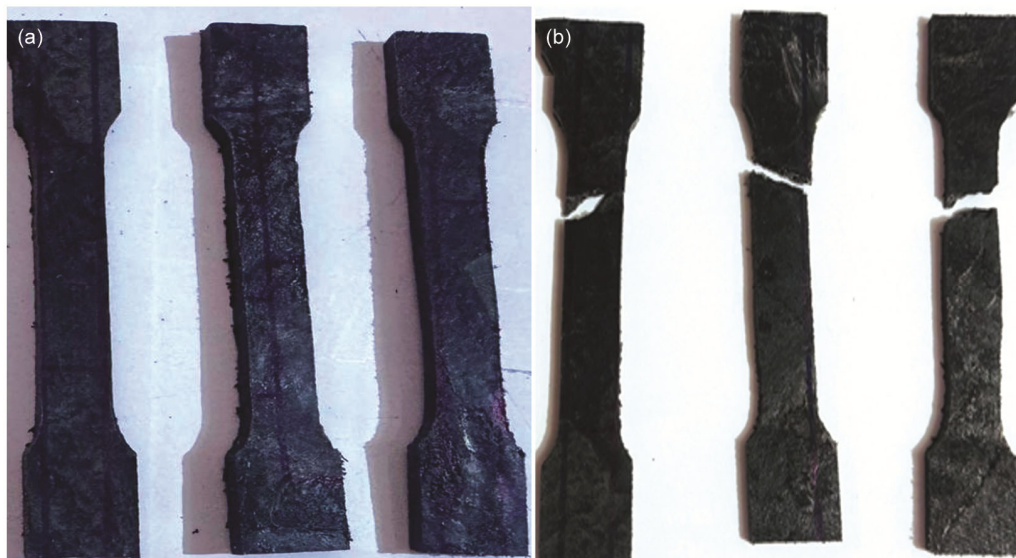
Tensile test specimens (a) before testing; and (b) after testing
